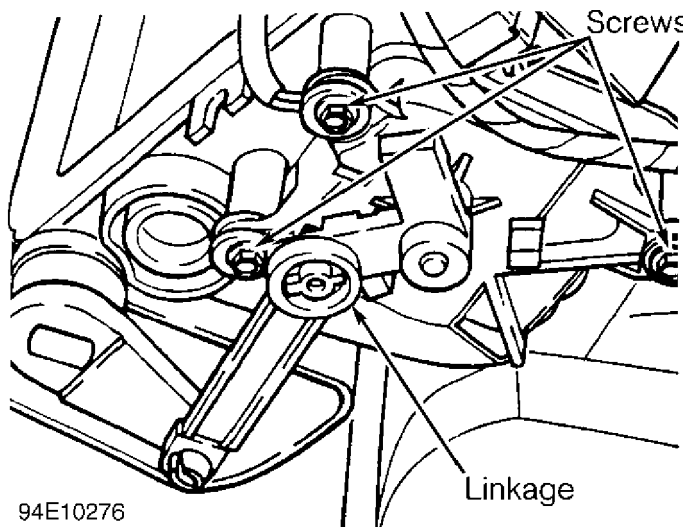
Removing Central Air Distribution Flap Motor (90 CS)
